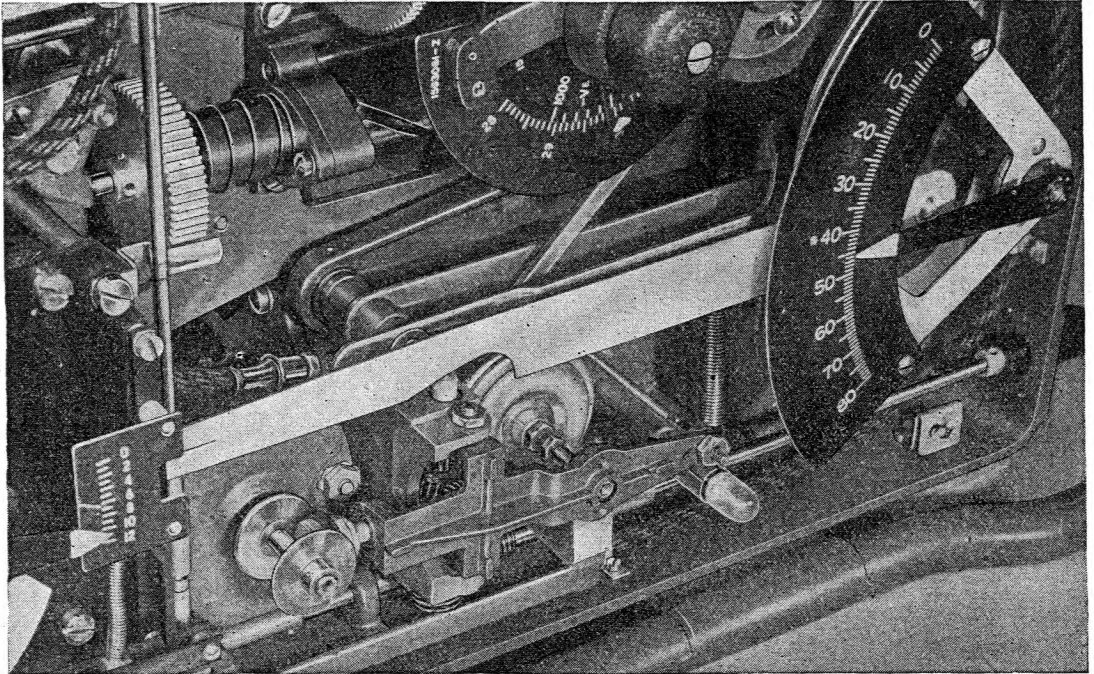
Drift angle servo motor assembly (compare with Fig. 49 in Chap. 9)
